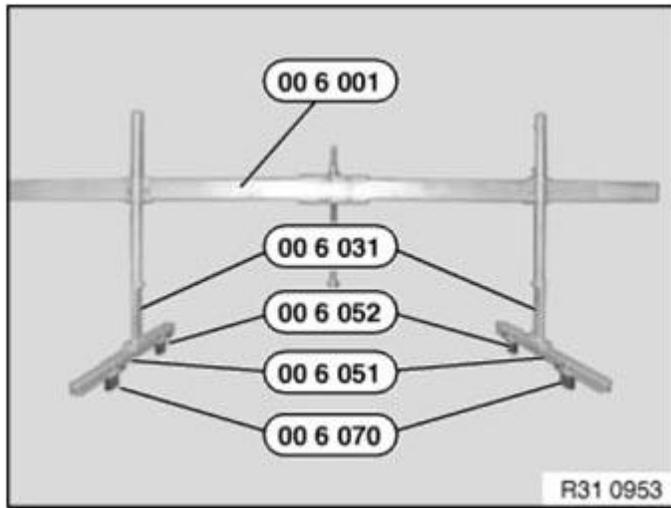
Identifying Profile Strips (00 6 051), Supports (00 6 070), And Connections (00 6 031)
